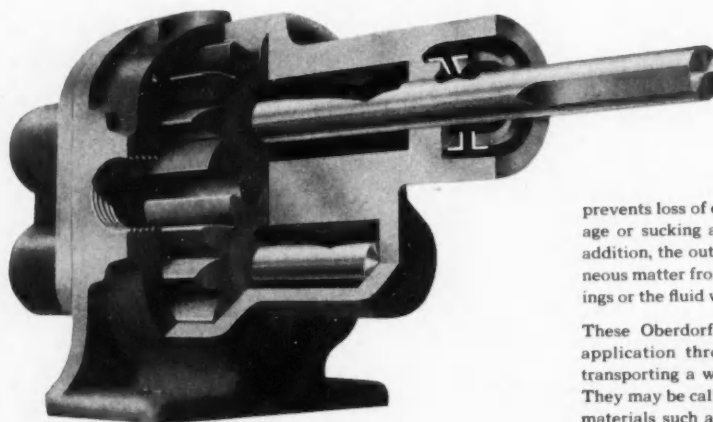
Cut-away drawing of the Oberdorfer Rotary Gear Pump showing position of National Syntech® Oil Seals.
